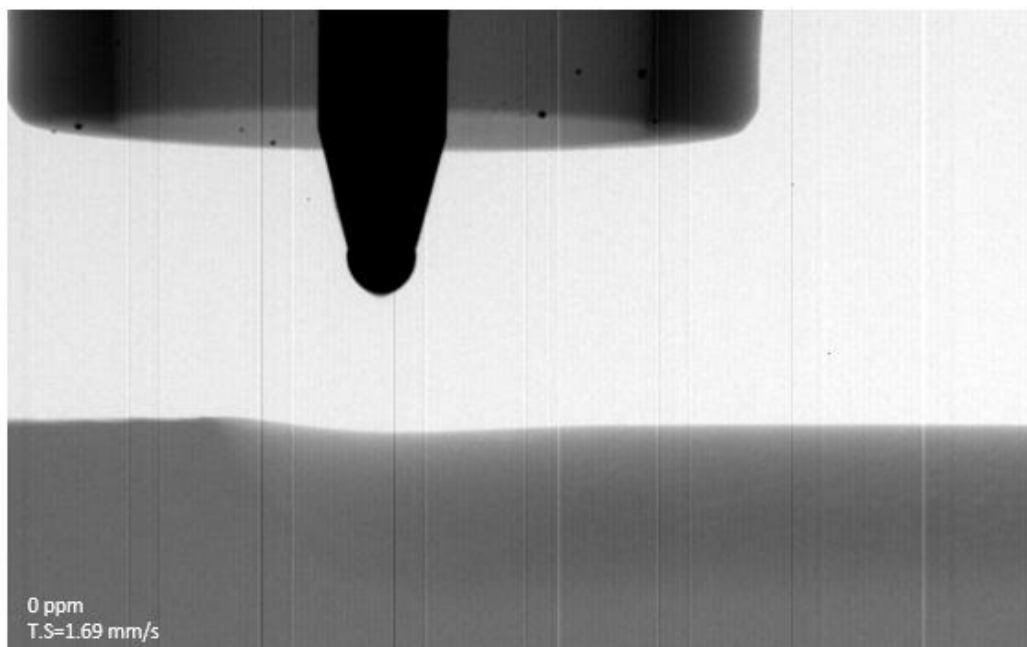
Alloy 6061 welded using 0 ppm of shielding gas hydrogen at 1.69 mm/s
